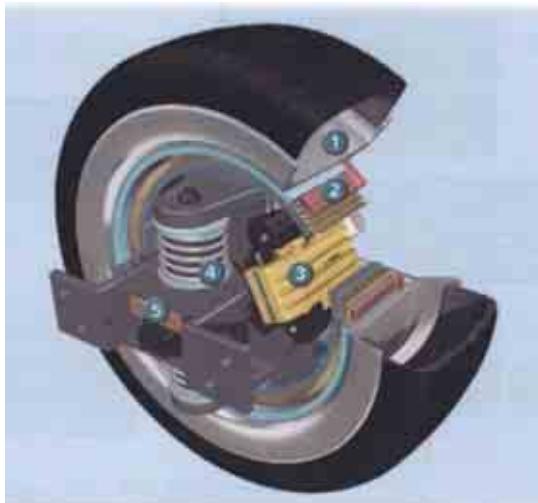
Wedge Brake integrated into a "wheel robot" with electrical hub motor
